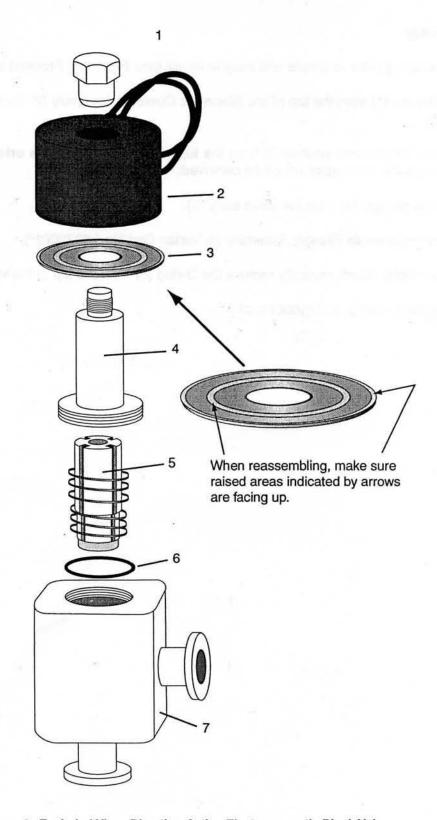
Exploded View, Directing-Acting Electromagnetic Block Valve
